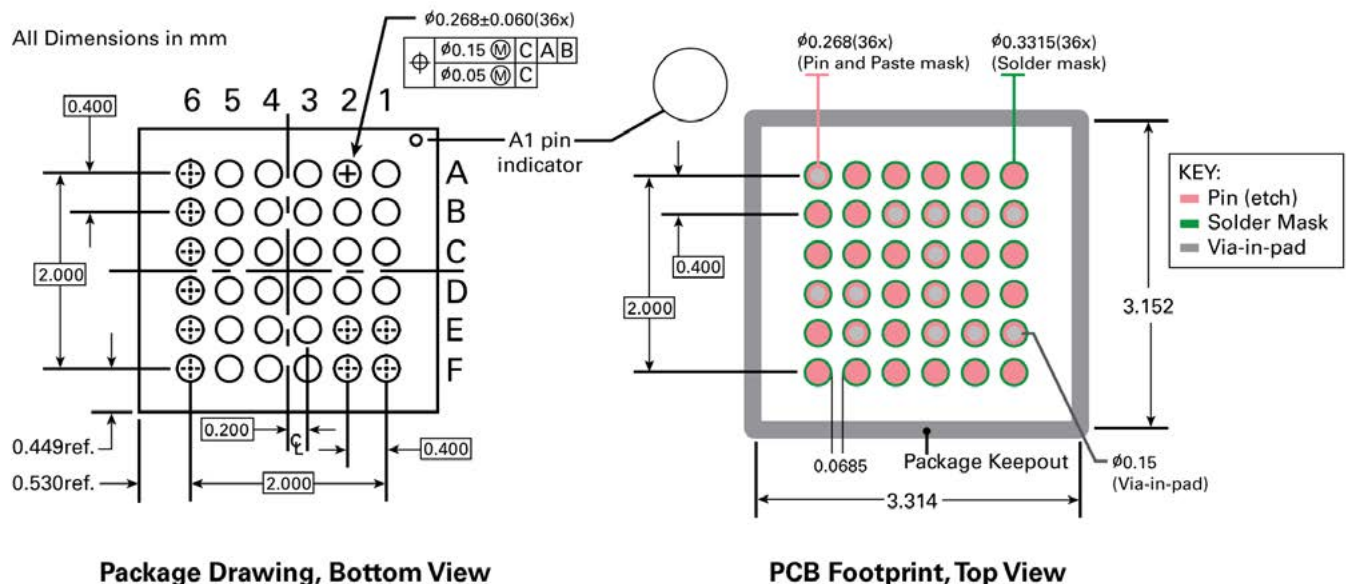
36-pin CSP packaging diagram used to hold an IDTP902x wireless power receiver IC.
